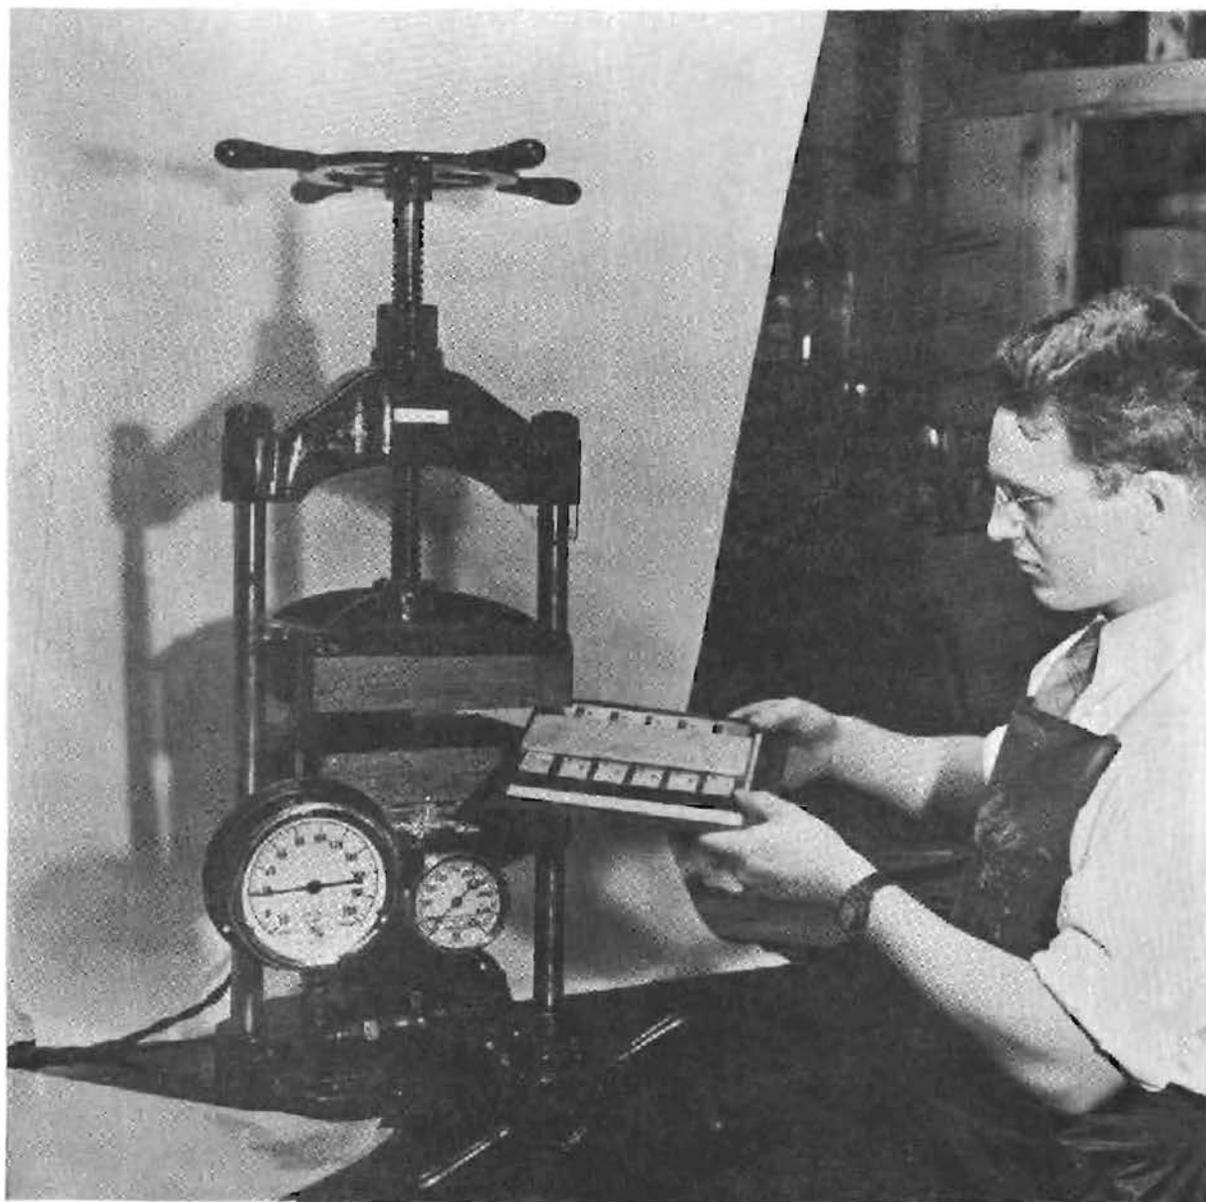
Hot-press gluing of wood-to-metal joint specimens showing electric hot press, pressing jig, and specimens.
